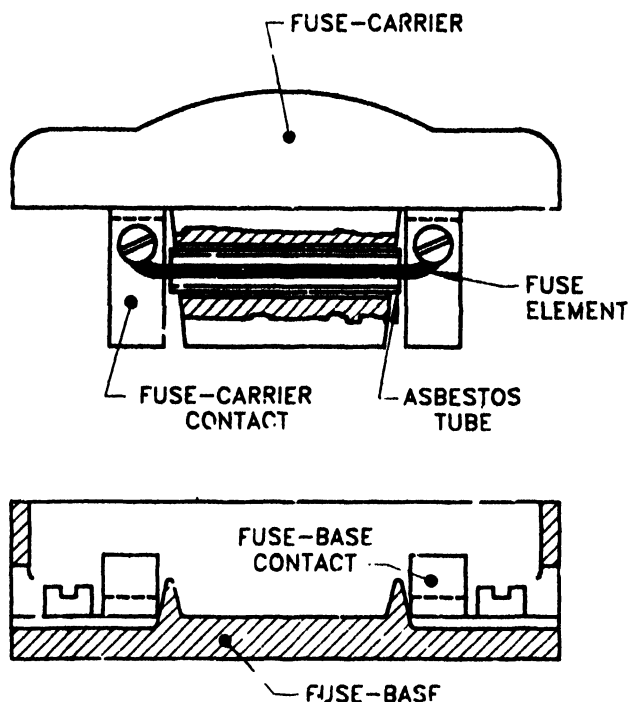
TYPICAL COMPONENT PARTS OF REWIRABLE FUSES
